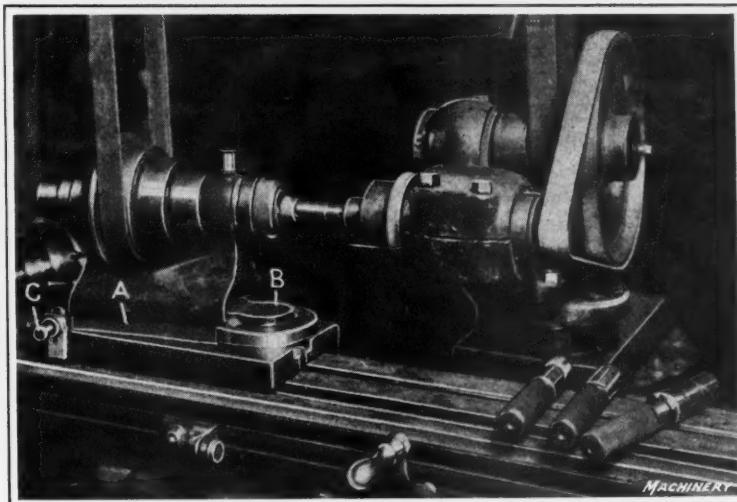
Grinding the Spindle Bore and producing a Bearing Surface for the Collet Chuck
